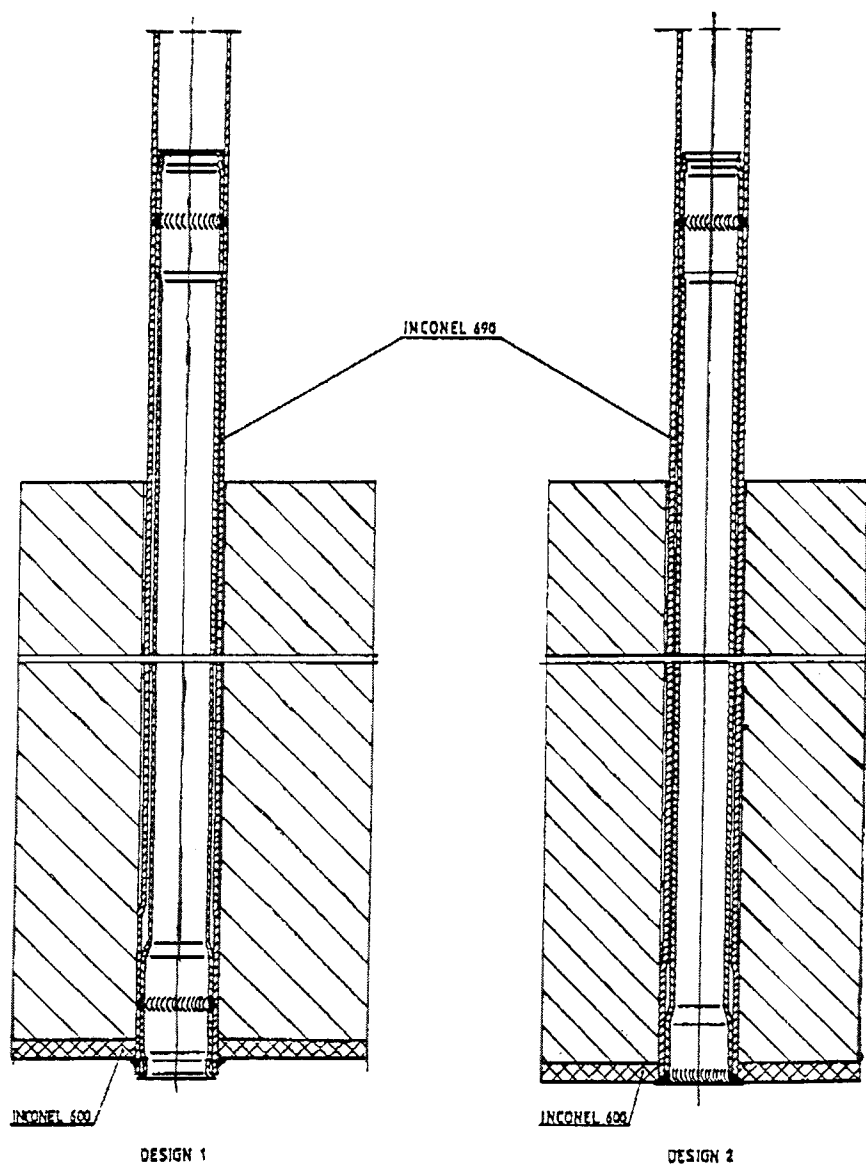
ASEA Brown Boveri Welded Sleeves
